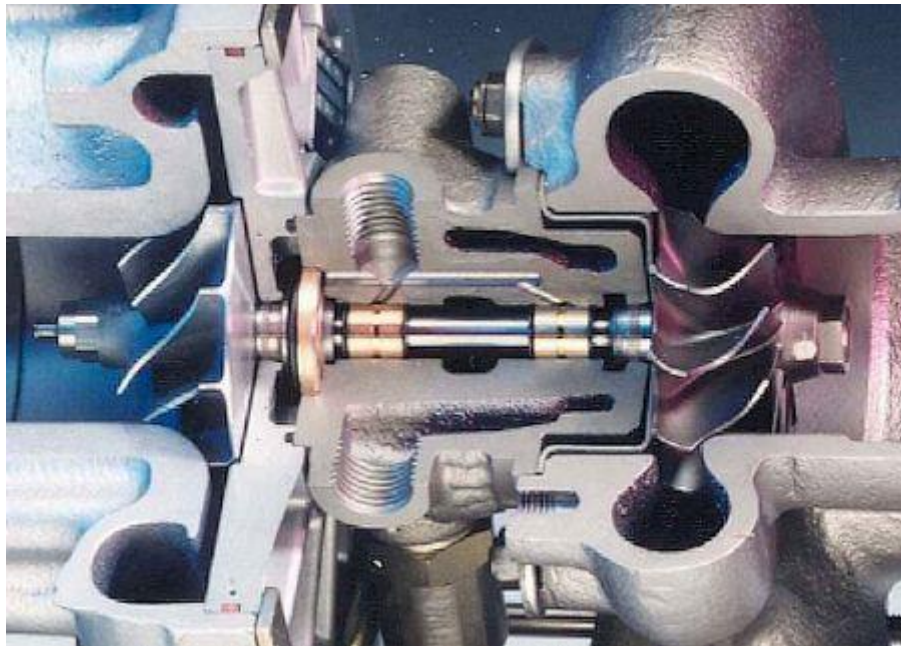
Sectional view of an exhaust gas turbocharger for a gasoline engine showing compressor wheel (left) and turbine wheel (right). The bearing system consists of a thrust bearing and two fully floating journal bearings
